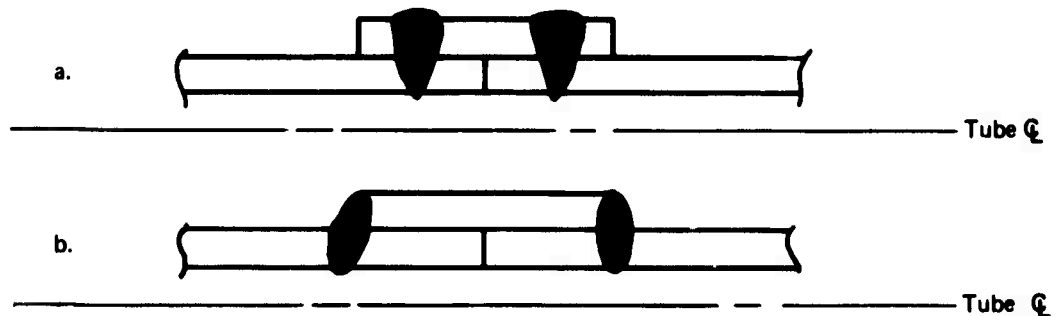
WELD BEAD CONFIGURATION FOR SHEAR LOAD JOINTS
